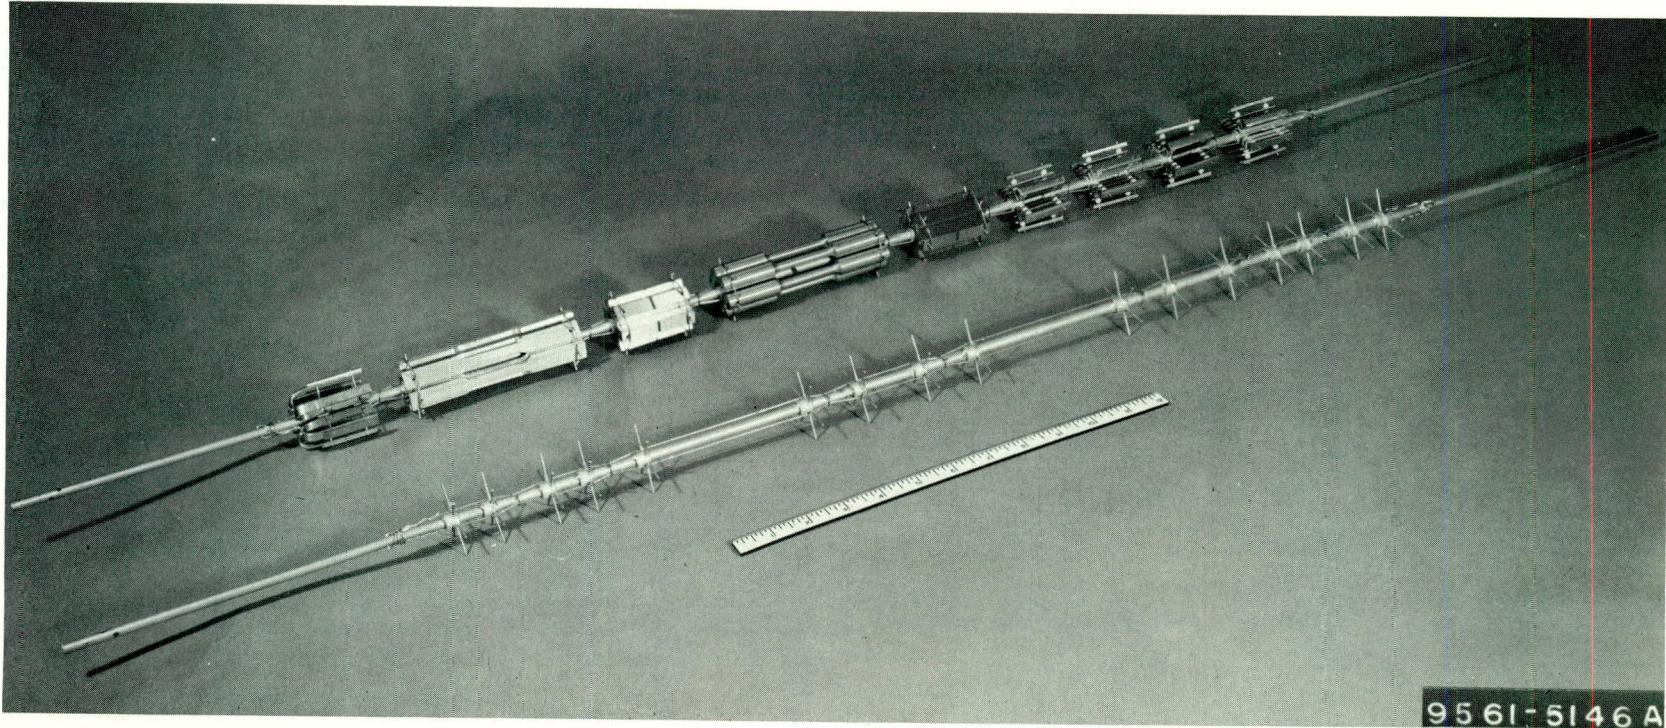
Dummy Fuel Element Specimen Holder and Specimens
